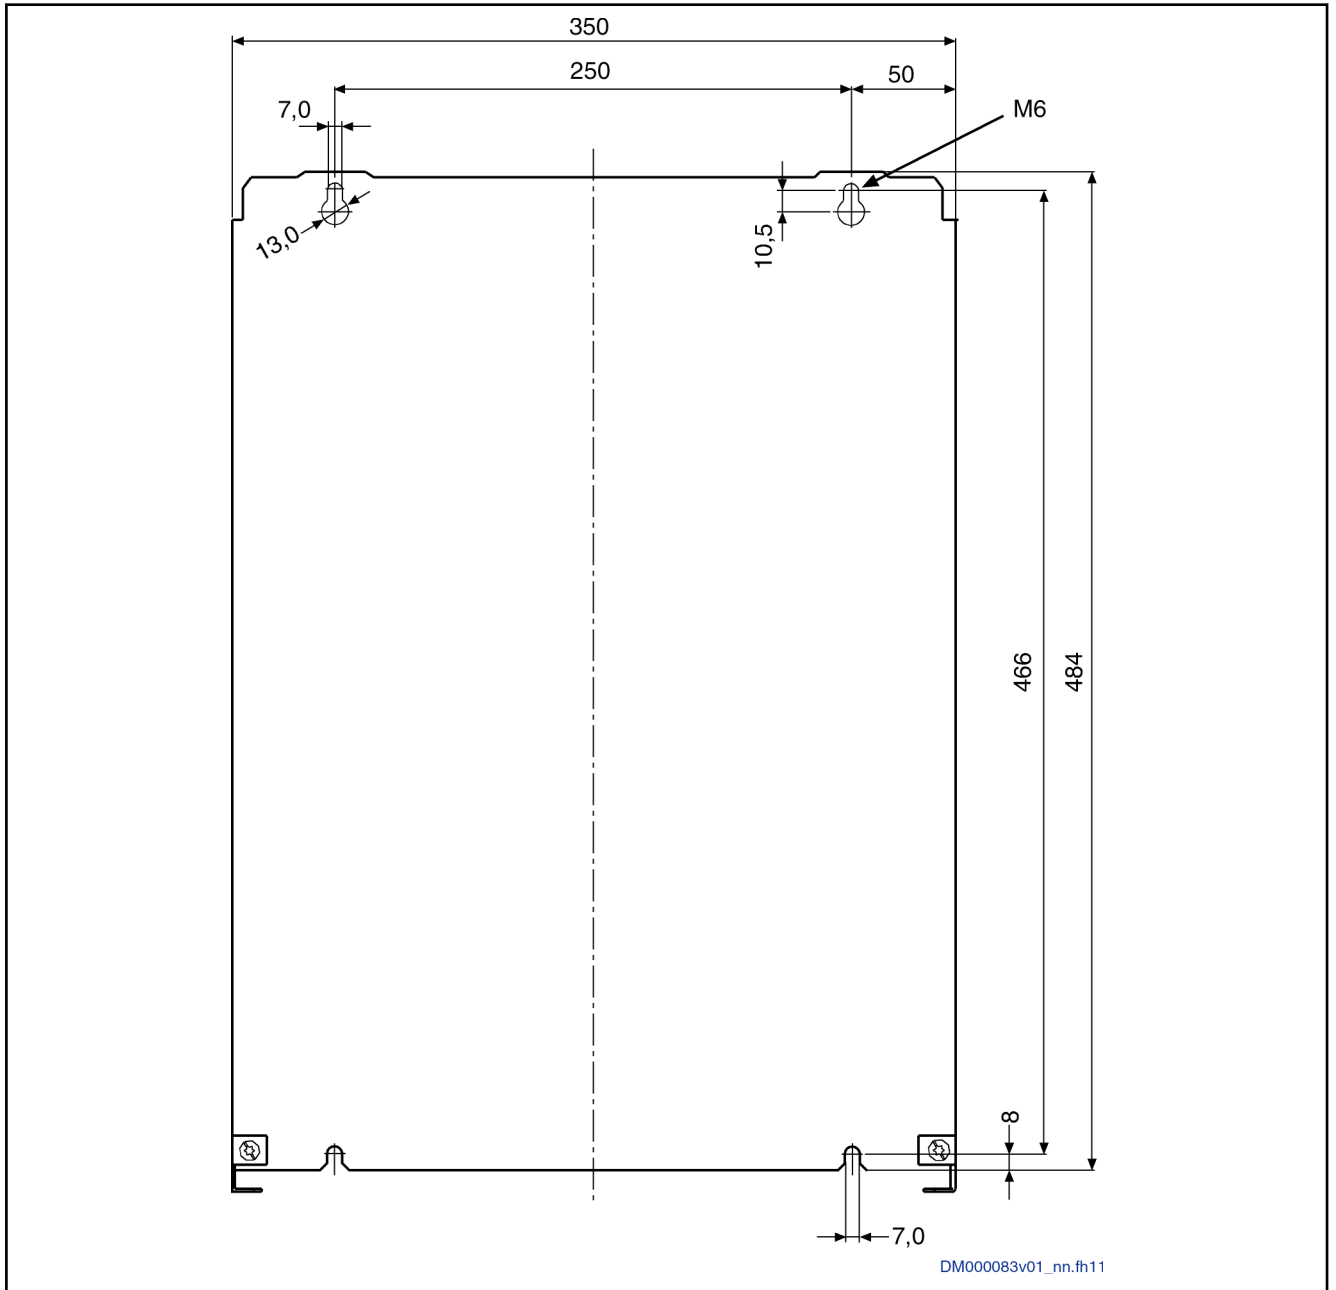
Boring dimensions HCS03.1E-W0210/280/350
